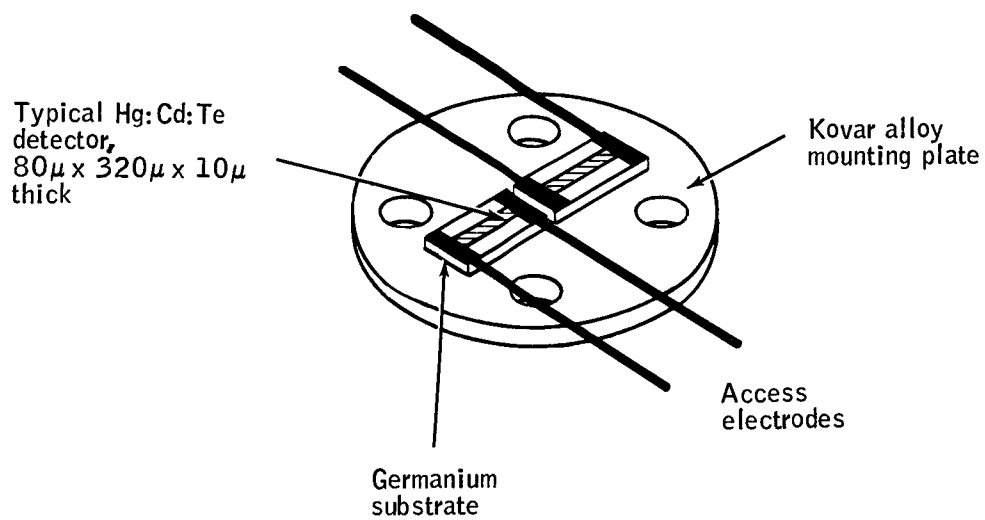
Sketch of Hg:Cd:Te Detector Element Assembly
